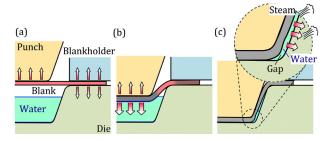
Gaps between stamped part and die during holding at bottom dead centre for die quenching.
